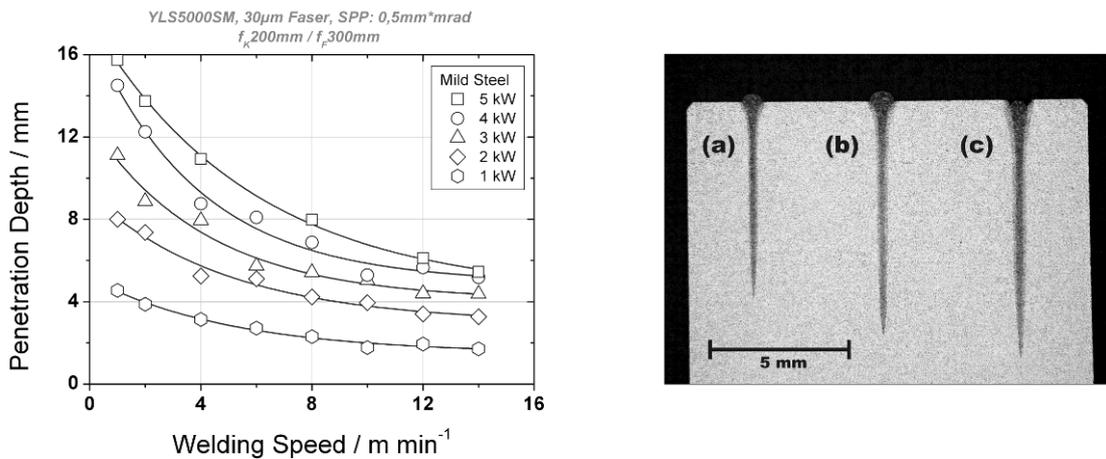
Penetration depth versus welding speed for single-mode fiber laser welding of mild steel as a function of laser power (left) and weld seam geometries of single-mode fiber laser welds at 5 kW laser power in mild steel S235 as a function of welding speed, (a) 8 m min⁻¹, (b) 6 m min⁻¹, (c) 4 m min⁻¹.
